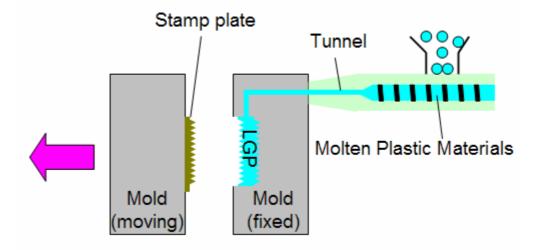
Schematics of injection molding machine. The left and right parts of mold are shown. The stamp plate is attached on the left side of mold.
